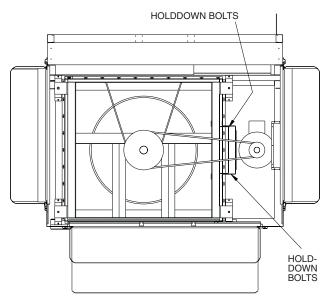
Return/Exhaust Fan Motor Plate Adjustment
